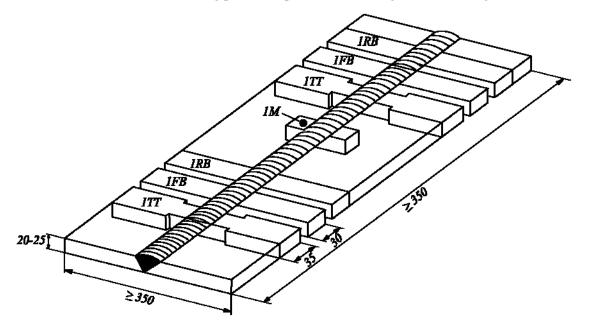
Additional butt weld test assembly for welding in downhand position: edge preparation shall be V-single with 70° angle;
